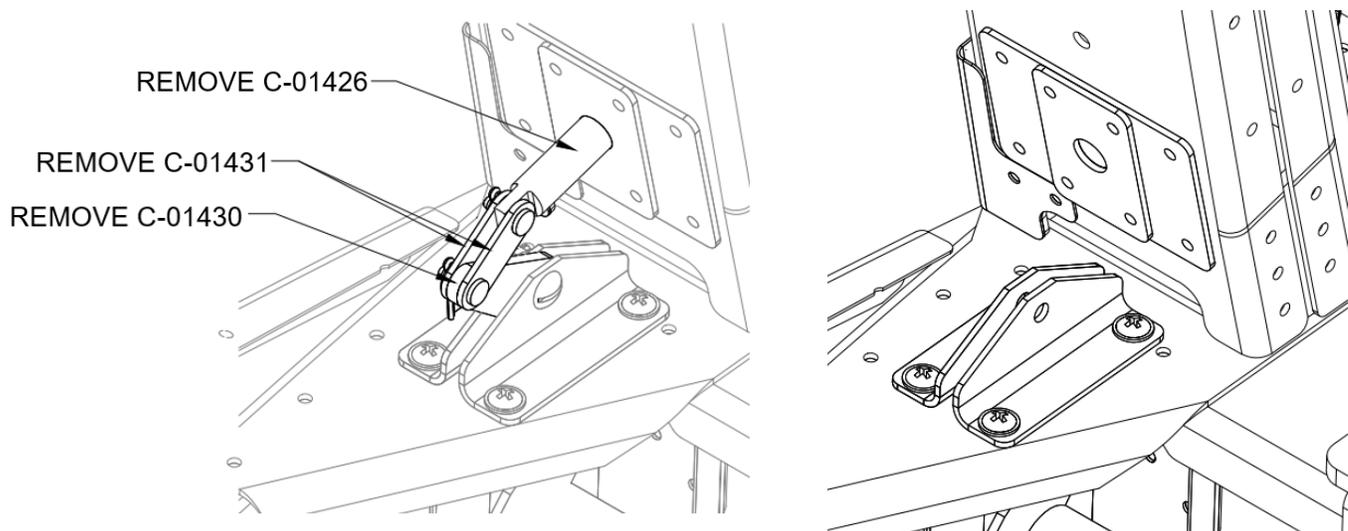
PIN, LINKS, AND BELLCRANK REMOVAL
